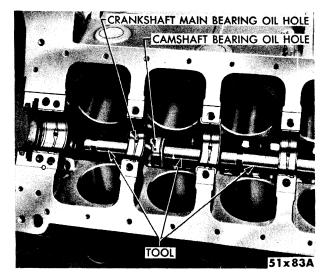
Installing Camshaft Bearing Shells Using Tool C-3034
